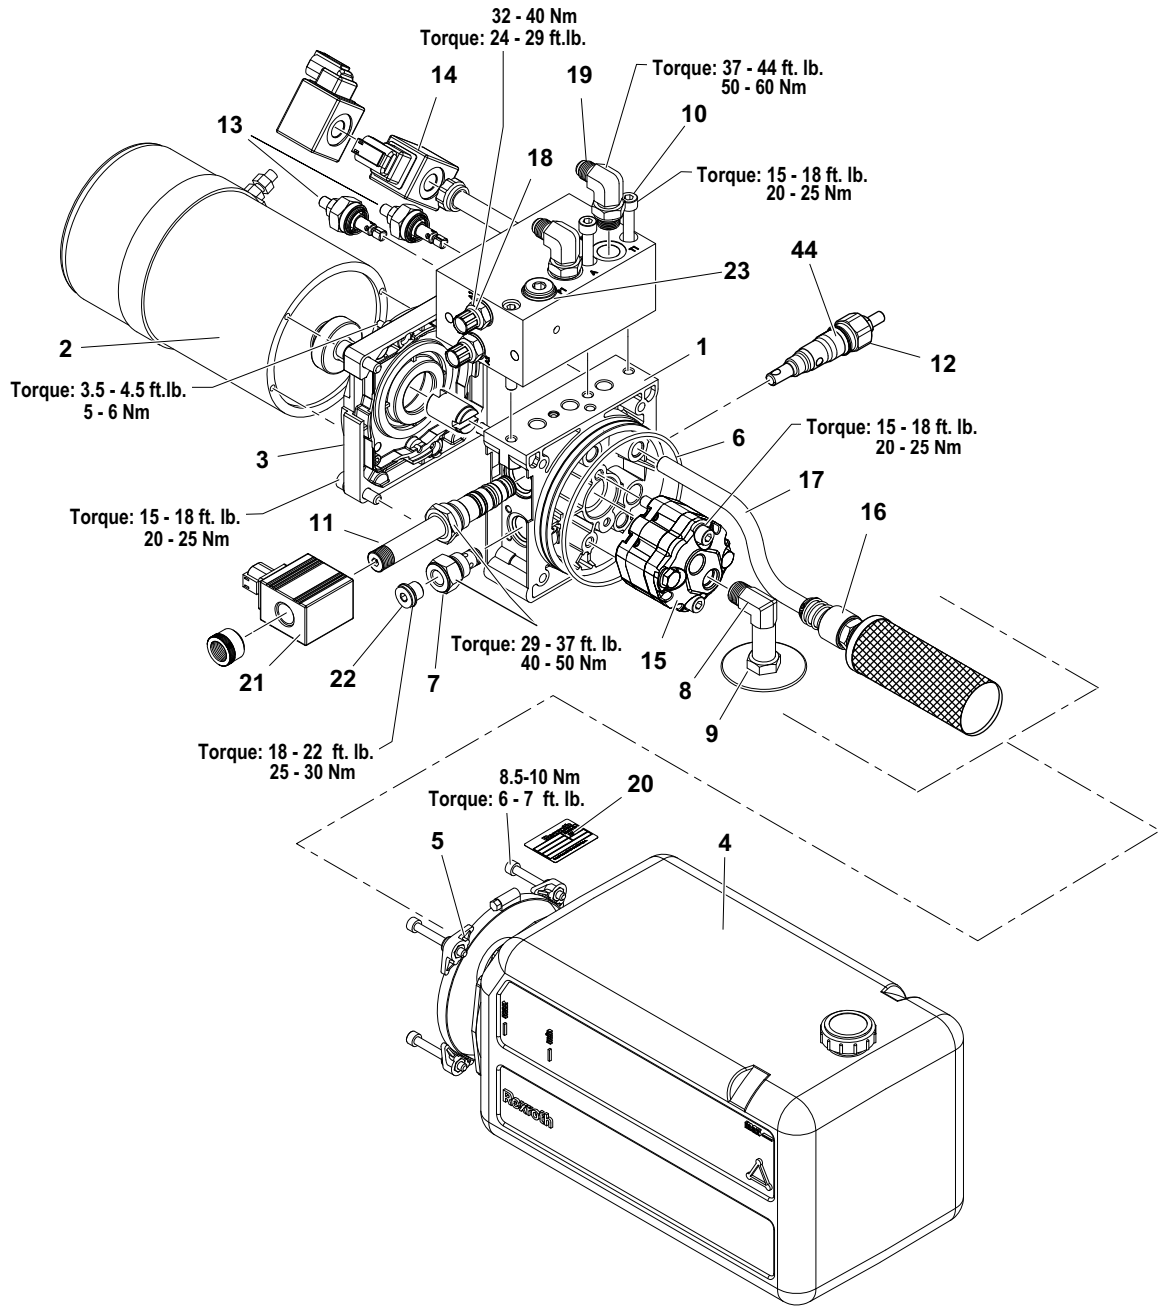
Hydraulic Motor, Pump and Tank Assembly (All Machines)
